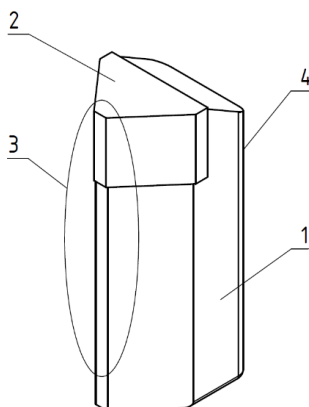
Basic structural model of the forestry milling tool; 1 – the tool body, 2 – the cutting wedge (tip), 3 – the frontal surface, 4 – the frontal surface
